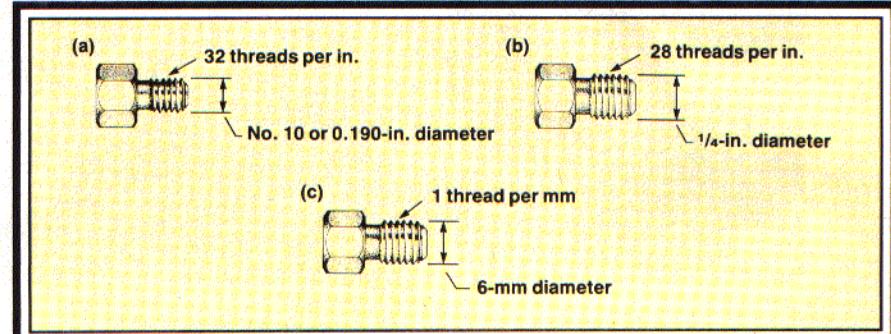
Thread types. (a) 10-32 threads, standard for most fittings used in the United States. (b) 1/4-28 threads, used only by Scientific Systems, Inc. (c) M6 threads, common in Europe.
